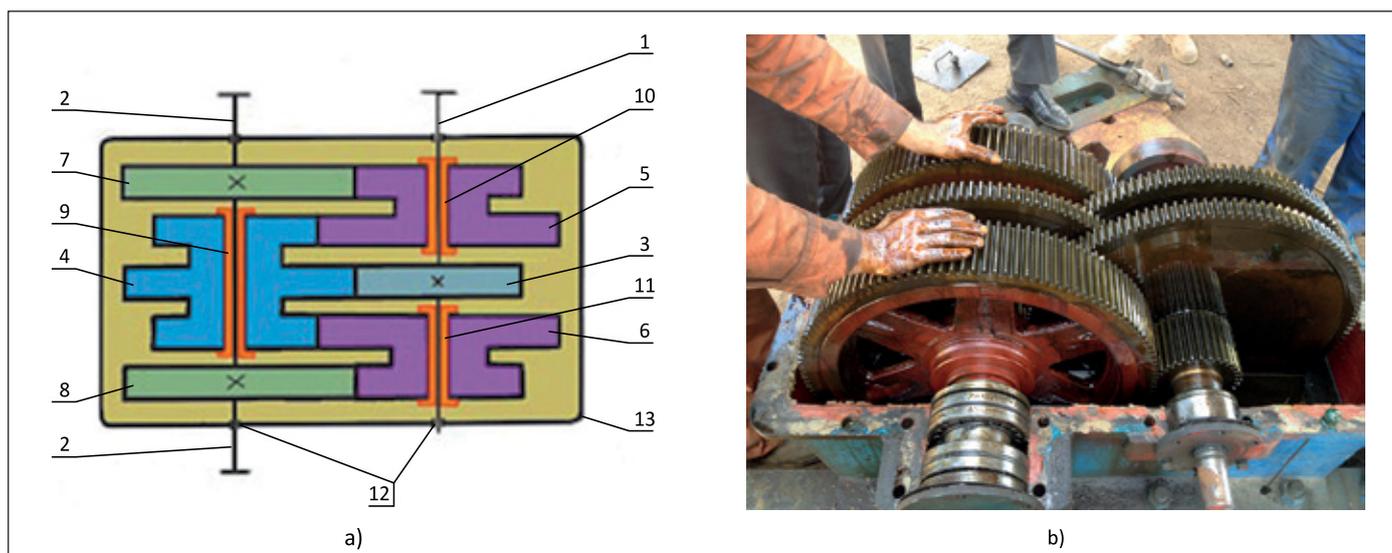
Kinematic diagram (a) and view of the working model (b) of the new designed three-stage double-line gear reducer (see text for explanations)
